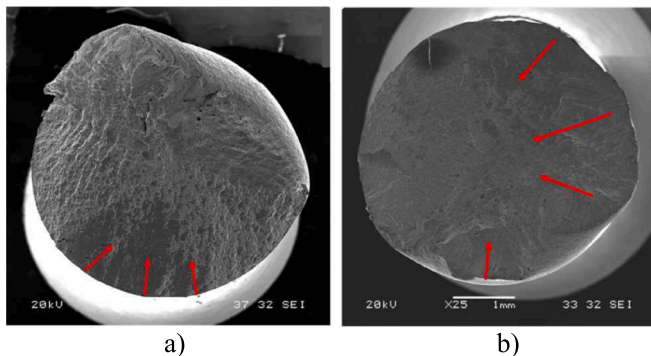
Fracture surfaces after rotating beam fatigue test (red arrows indicate initiation and growth direction of the damage): a) Specimen 2 and b) Specimen 3.
